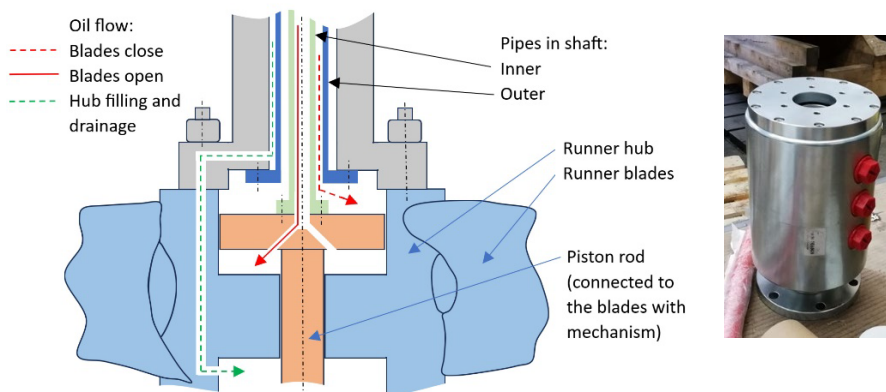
Kaplan runner with integrated servo cylinder and pipes in shaft, oil head (right).
